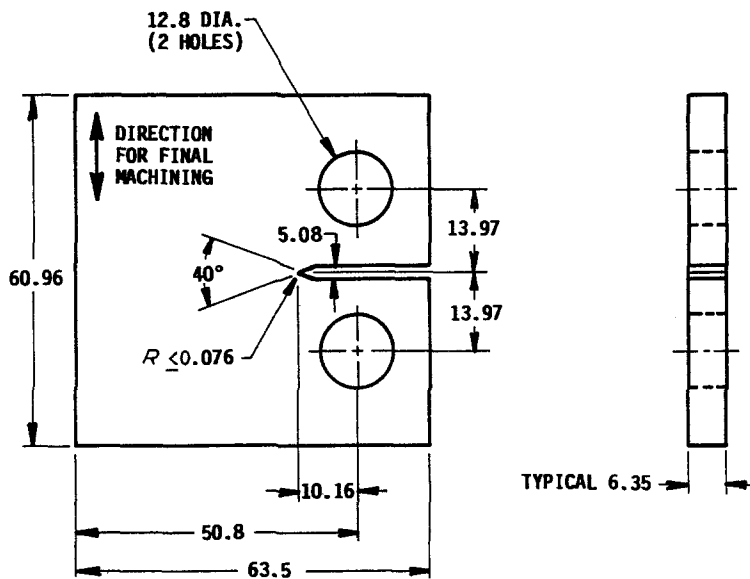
Design and dimensions (mm) of the specimens used for the measurement of fracture toughness.
